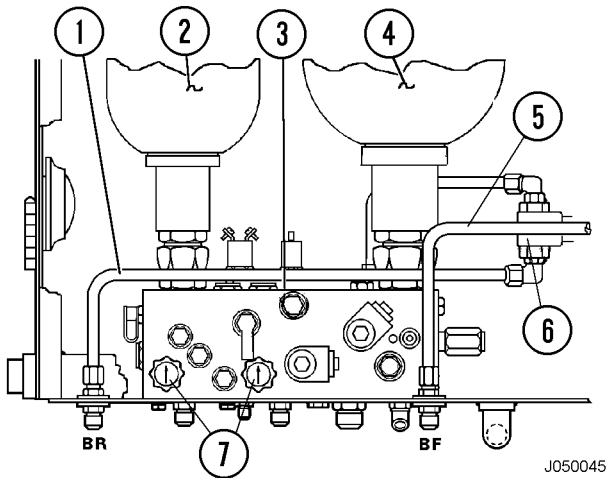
BRAKE MANIFOLD AND COMPONENTS
